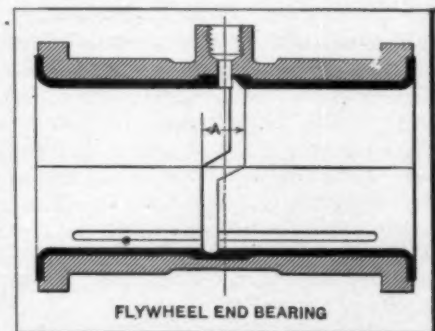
Flywheel end bearing, of extra length, with white metal lining and arranged for forced lubrication
